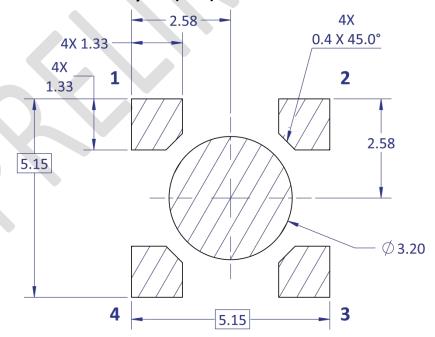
Recommended solder pad layout for anode, cathode, and thermal pad
